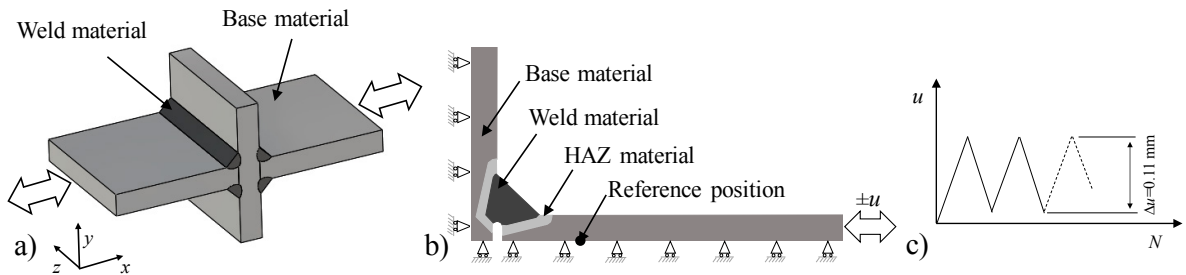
(a) Cruciform welded joint; (b) model and boundary conditions; (c) loading condition.
